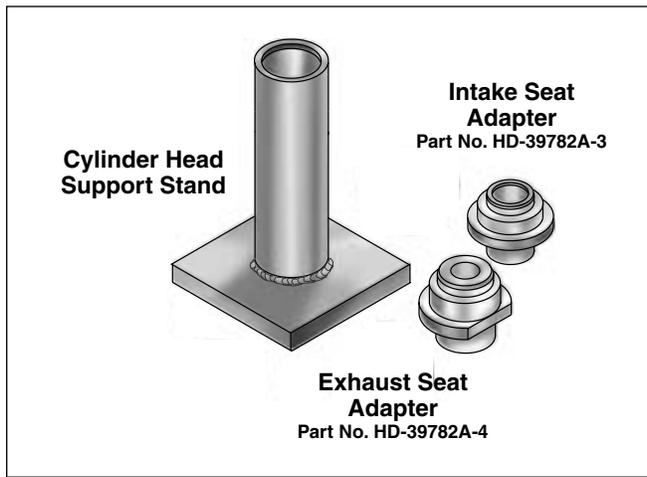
Cylinder Head Support Stand (Part No. HD-39782A)
